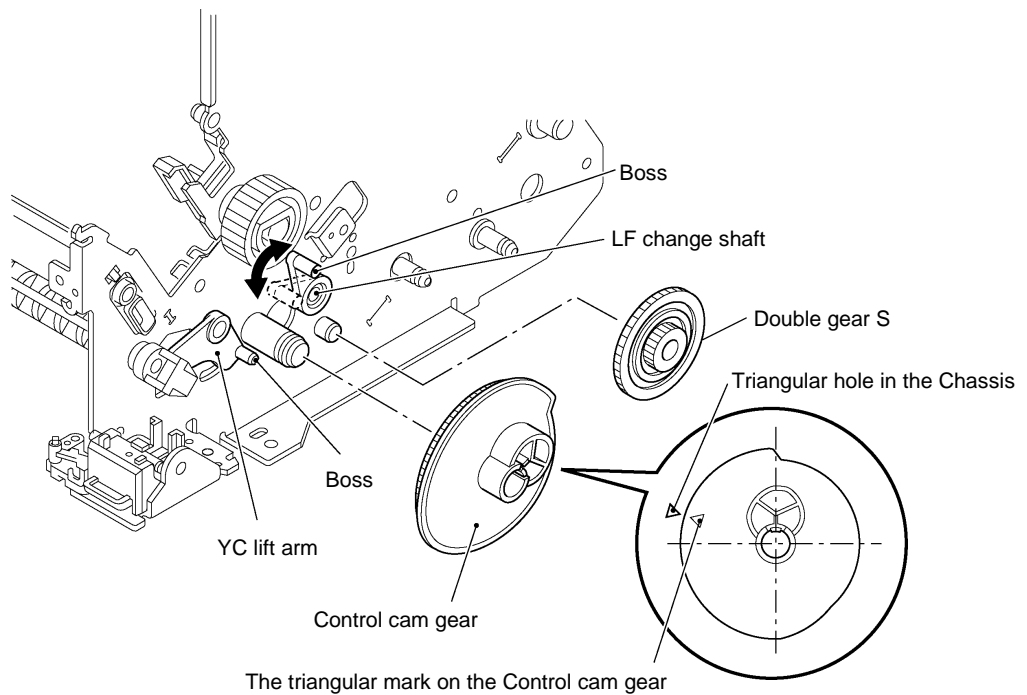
Installing the Right Side of the Chassis 1
